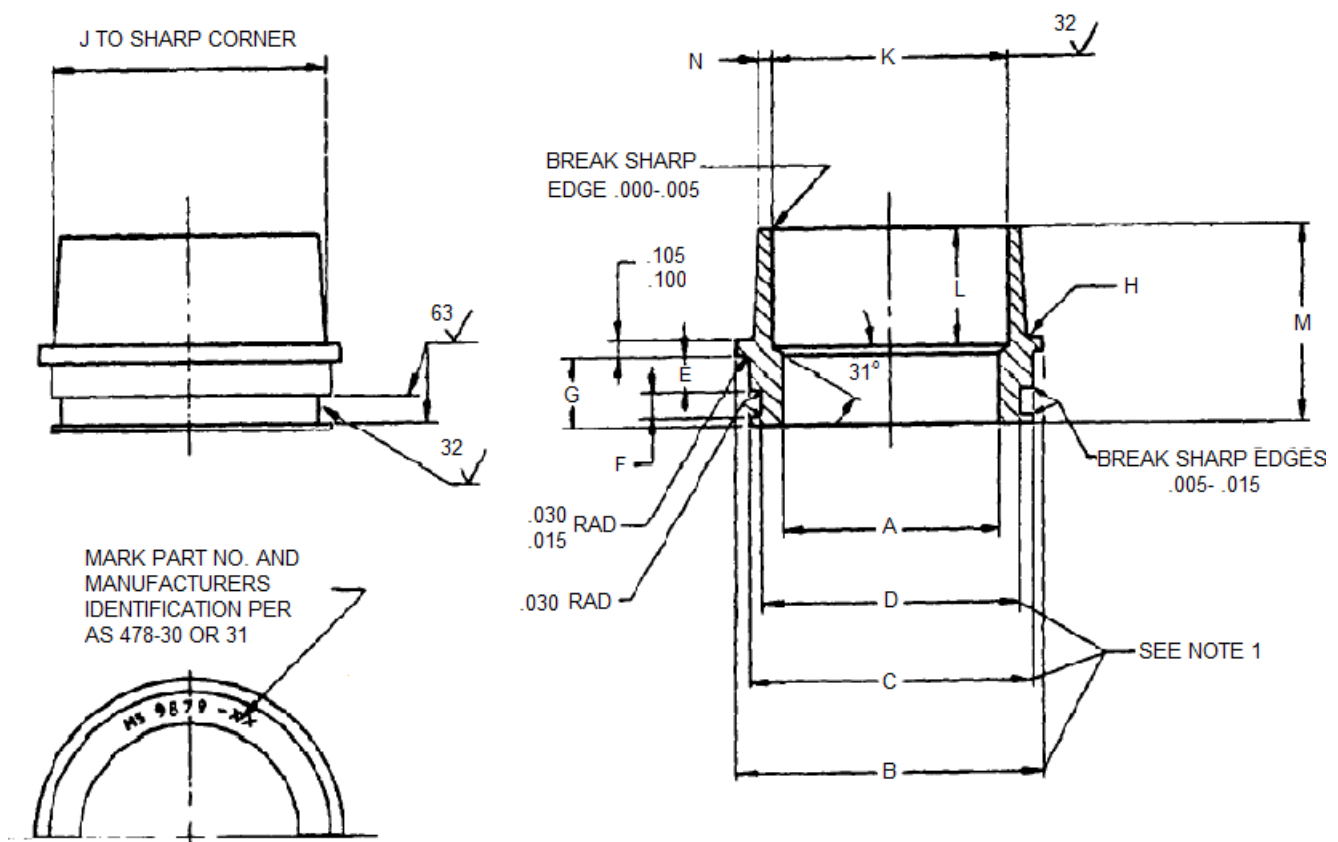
Swivel-piloted o-ring tube connection sleeve.
